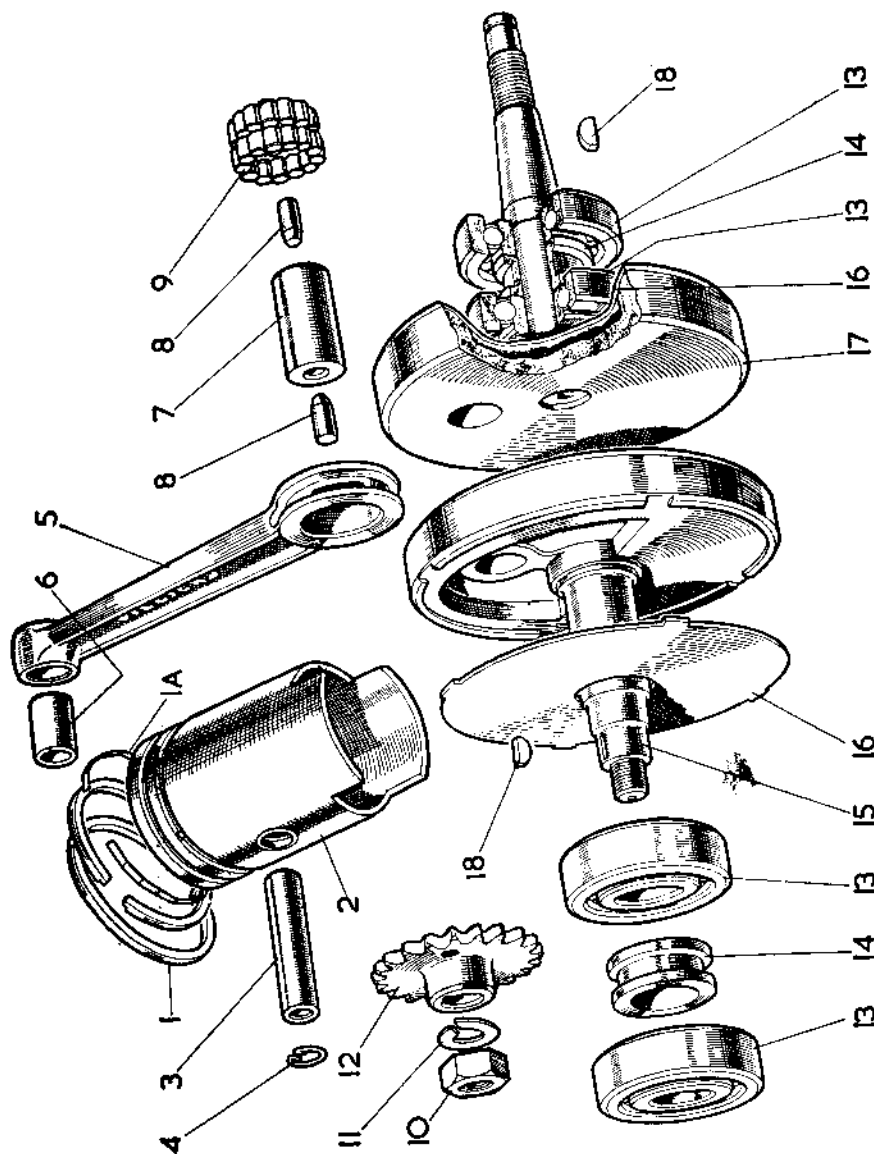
PISTON AND CRANKSHAFT GROUP.
